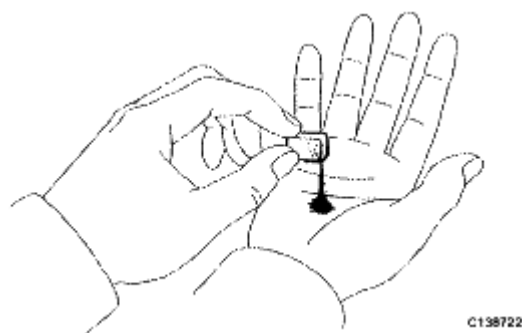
Inspecting Transmission Oil Cleaner Magnet
